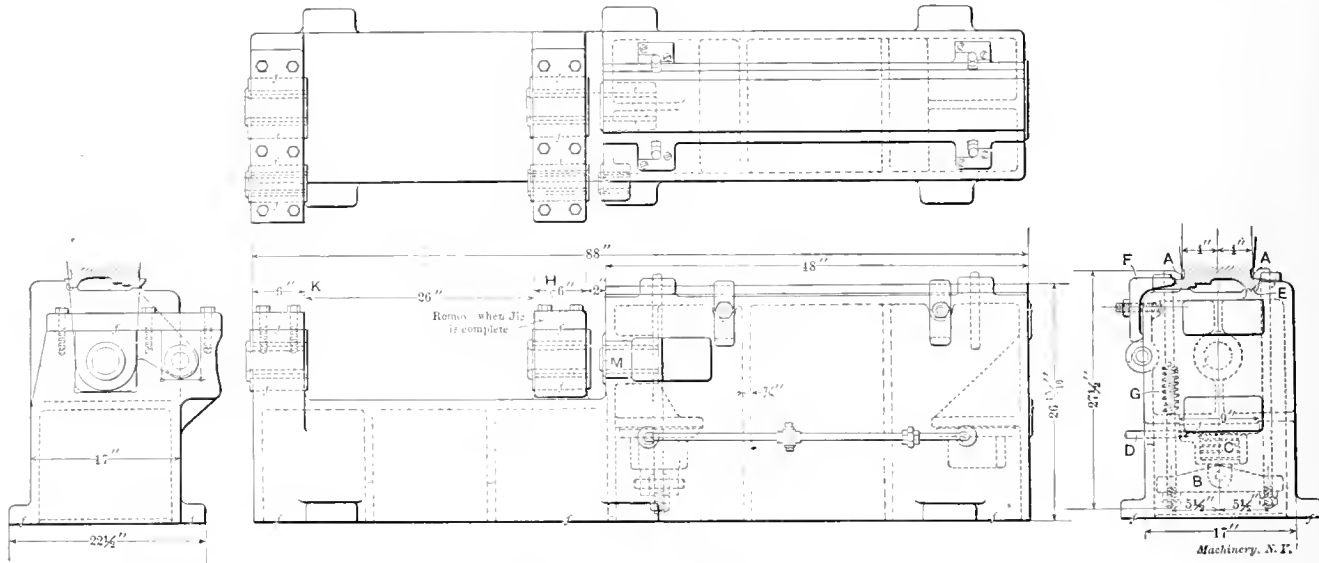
Plan and Elevation of Fixture shown in Fig. 1.
